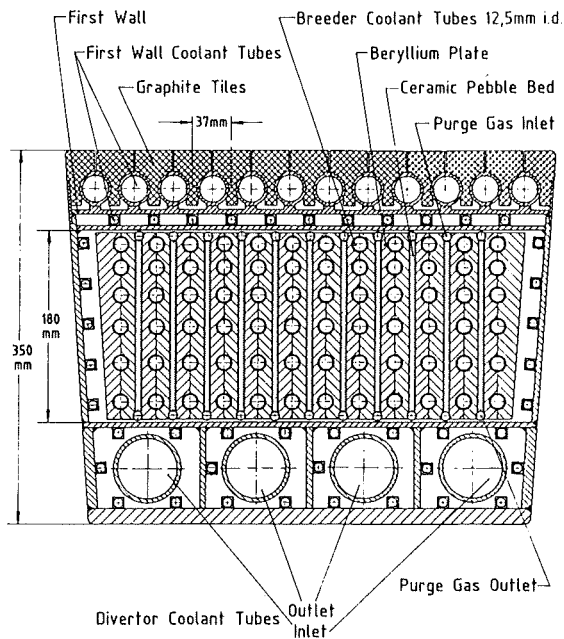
Helium Cooled Inboard Breeder Blanket Segment
